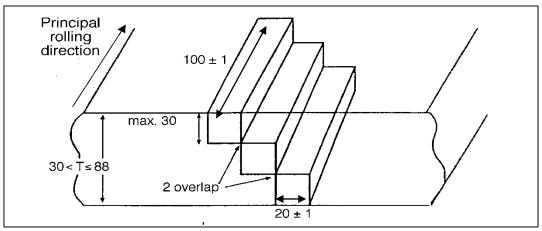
Test Specimen Location for Plates 30 mm (1.2 in) to 88 mm (3.5 in) Thick, Inclusive (All Dimensions in mm [1 in = 25.4 mm])
